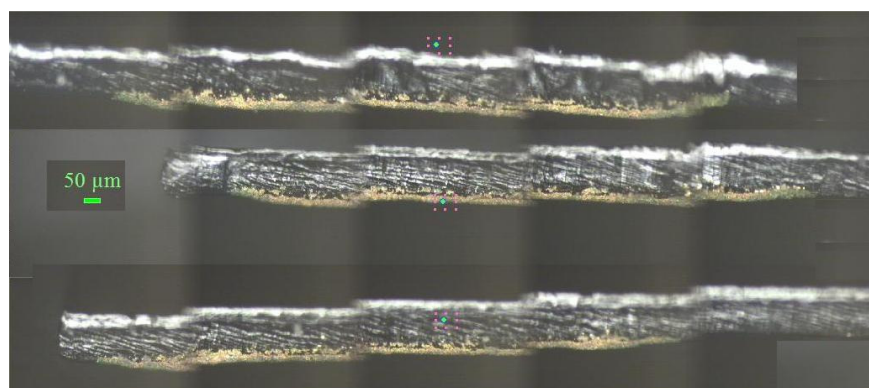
Triplicate of DuPont edge sensors with inside roller cut: 5 images per electrode showing the entire edge
